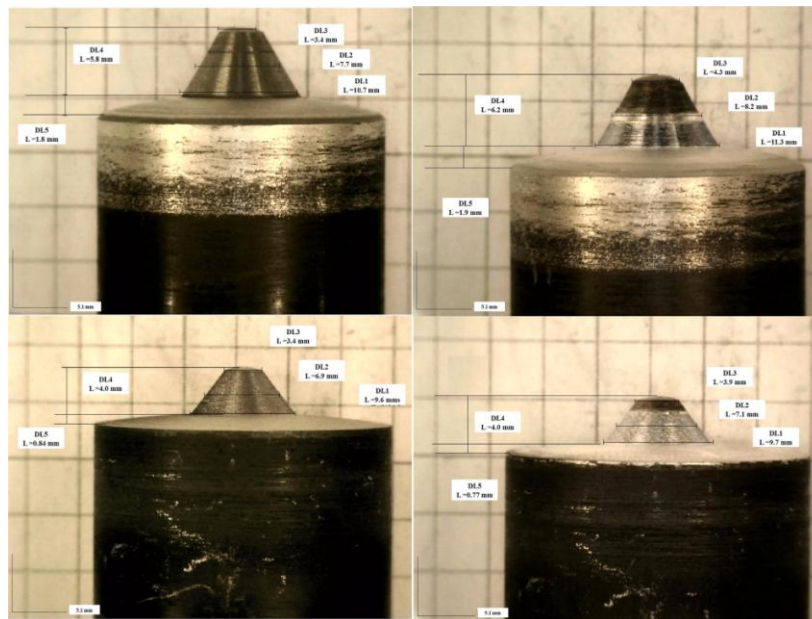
Dimensional analysis of pin tool A (top) and pin tool B (bottom) before and after welding^[21]
